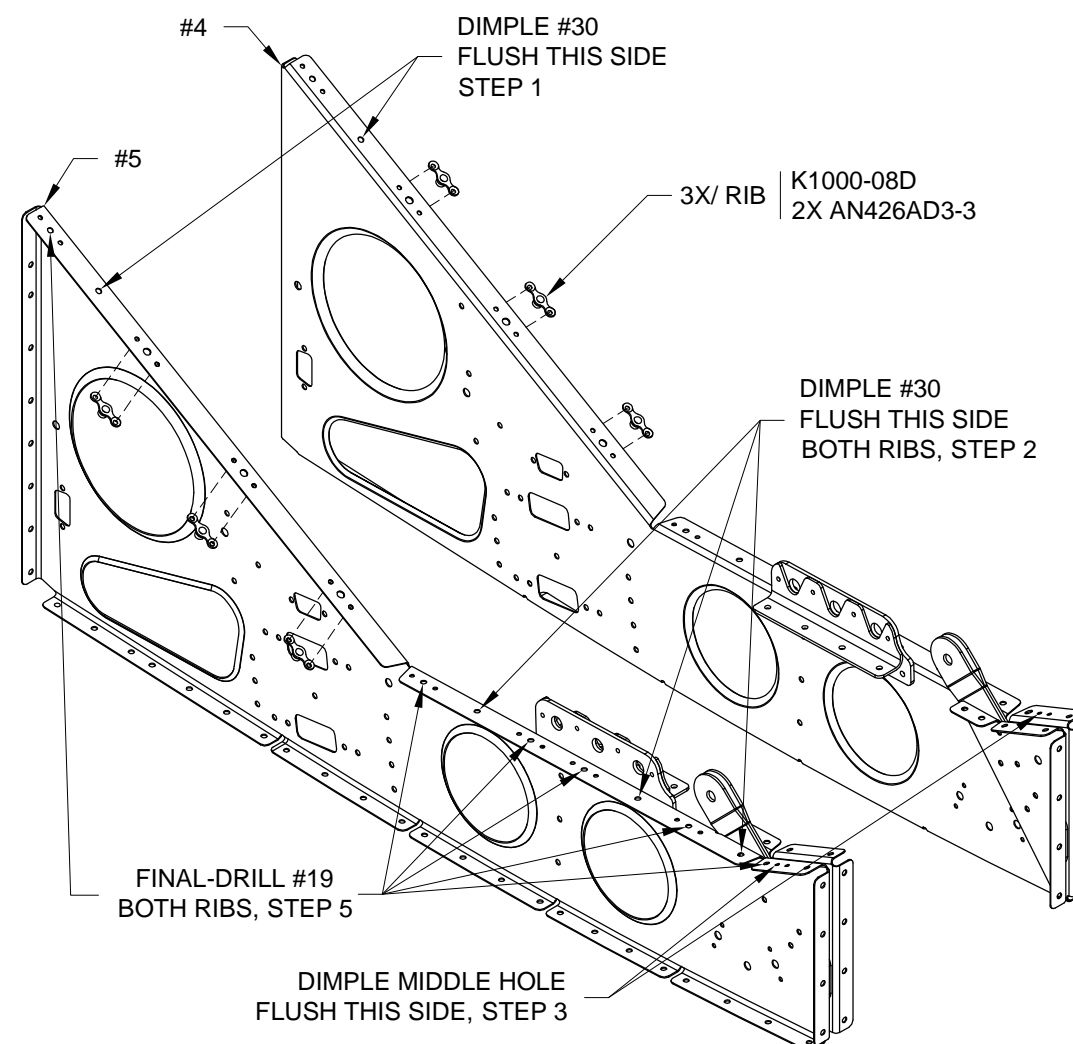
PREPARING SEAT RIB ASSEMBLIES
